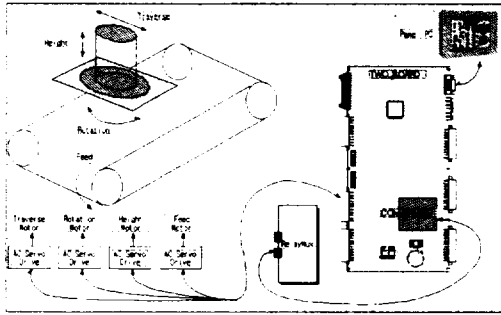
Schematic diagram of an automatic progressive stamping machine
